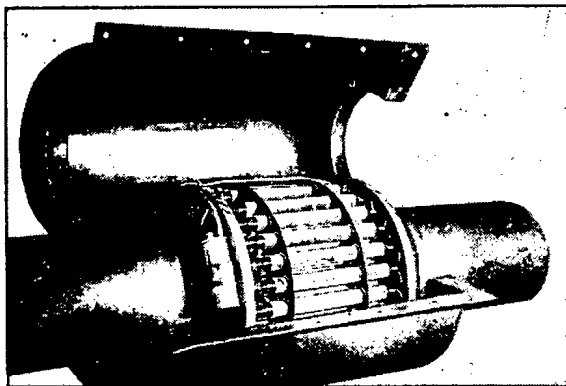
General view of the housing assembly installed on a ten-inch pipe line.
